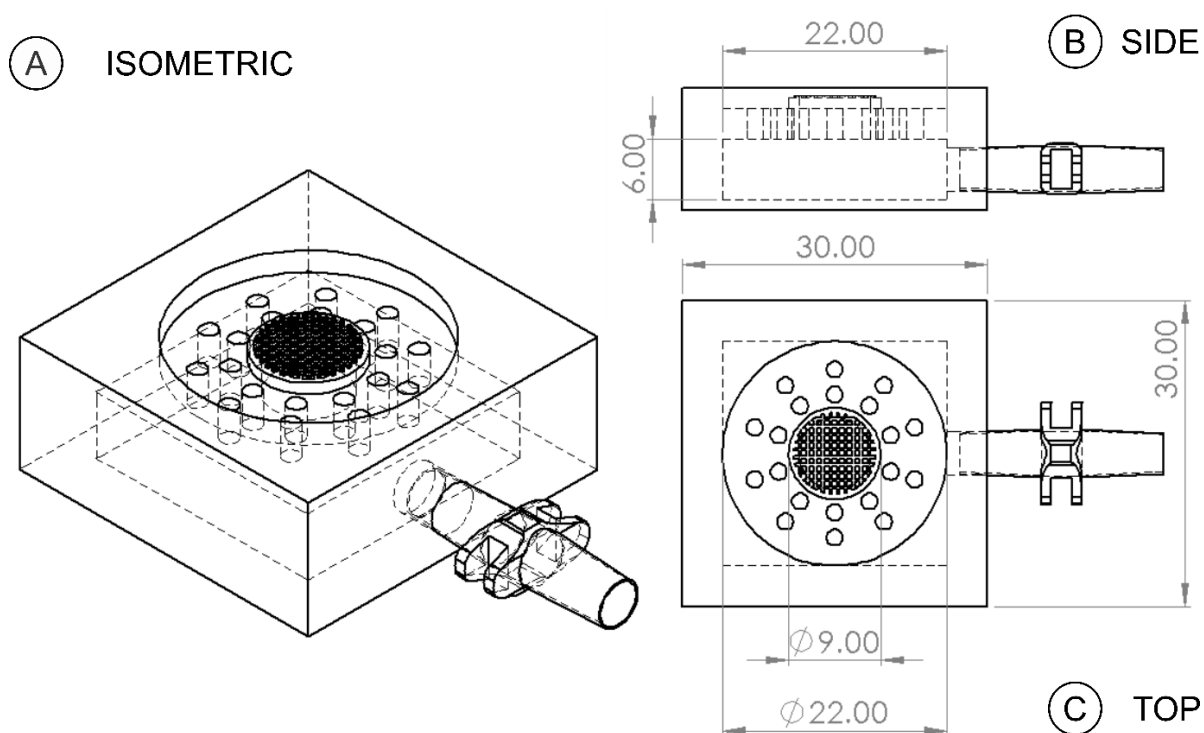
Engineering drawings of the vacuum former. Isometric (A), side (B), and top (C) views are provided with overview dimensions provided in millimeters.
